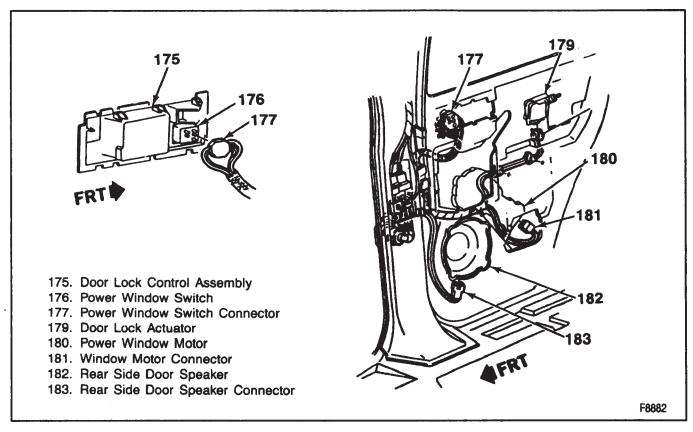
Power Window and Door Lock Switches (Rear Side Doors)
